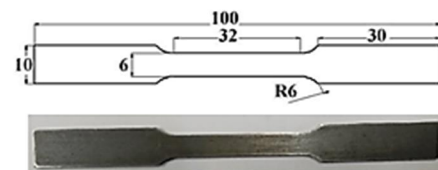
Dimensions of tensile test specimens according to ASTM E8M-99 standard in mm.
